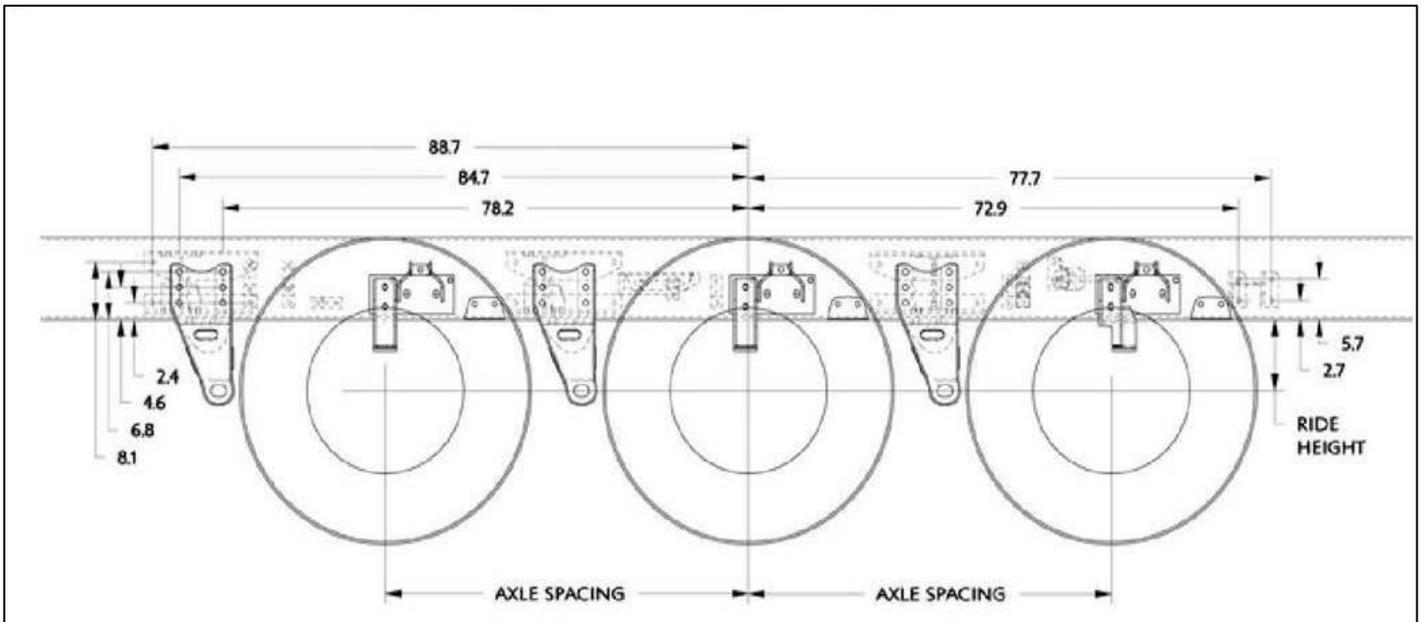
Neway ADZ 369/378 Frame Drilling (Dimensions In Millimeters)
